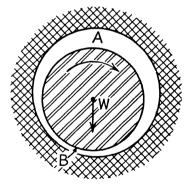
Position of rotating shaft, bearing lining, and film of lubricating oil
